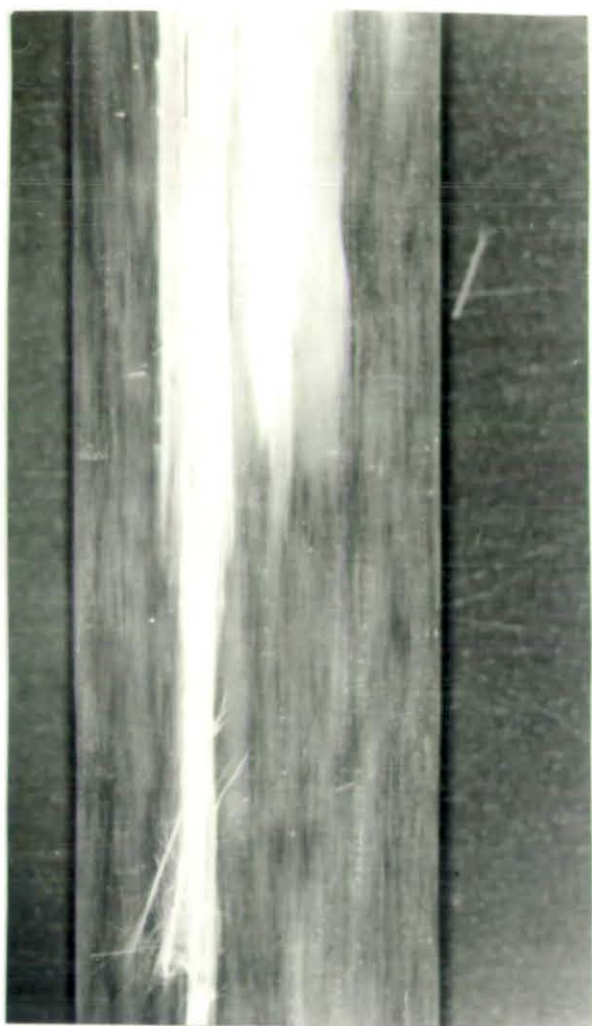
A TENSILE FAILURE IN 60% MODIFIED GRP SPECIMEN
